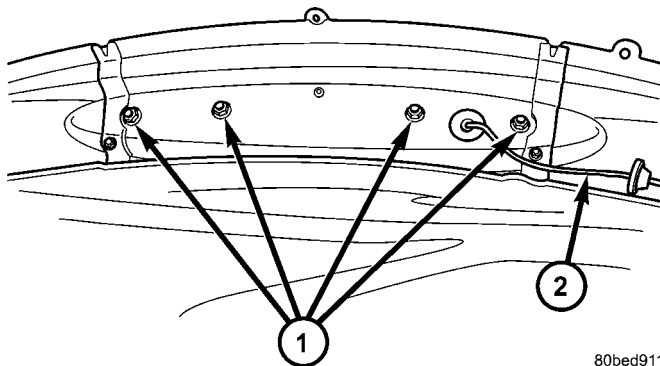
CENTER HIGH MOUNTED STOP LAMP
